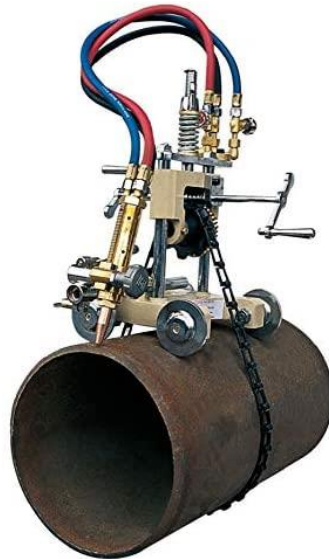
Cutting Beveling Machine Torch (Thokale et al., 2016).
